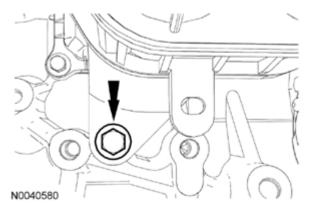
Locating Intake Manifold Lower Bolt Courtesy of FORD MOTOR CO.
